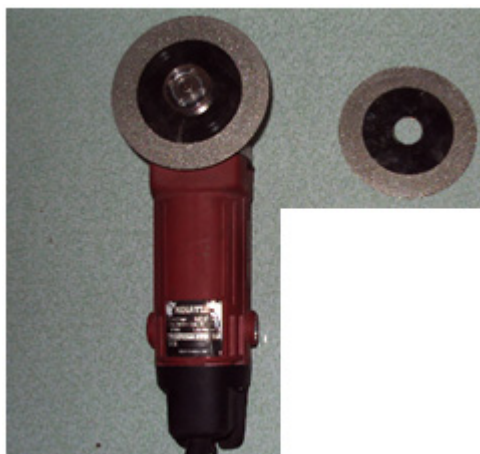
A 100 mm diameter diamond tipped cutting disk mounted on an industrial angle grinder
